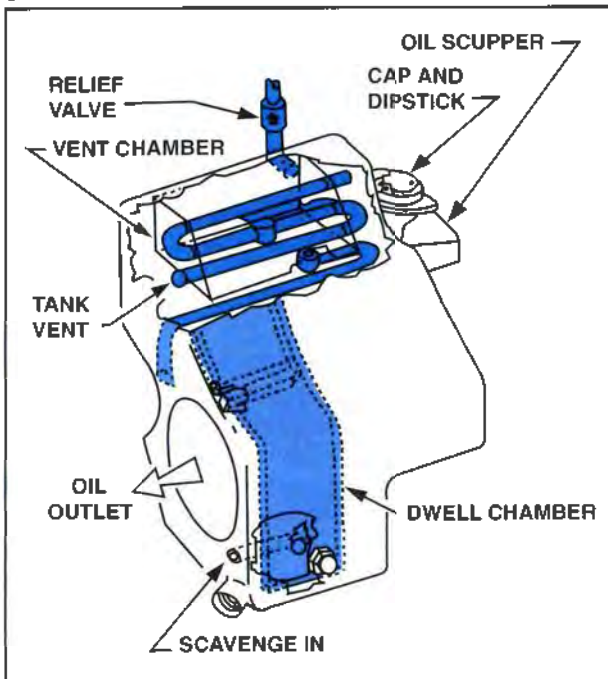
In an oil reservoir with a dwell chamber, oil enters the bottom of the oil reservoir. Oil passes through the dwell chamber and is spread into a thin film to release entrained air.
